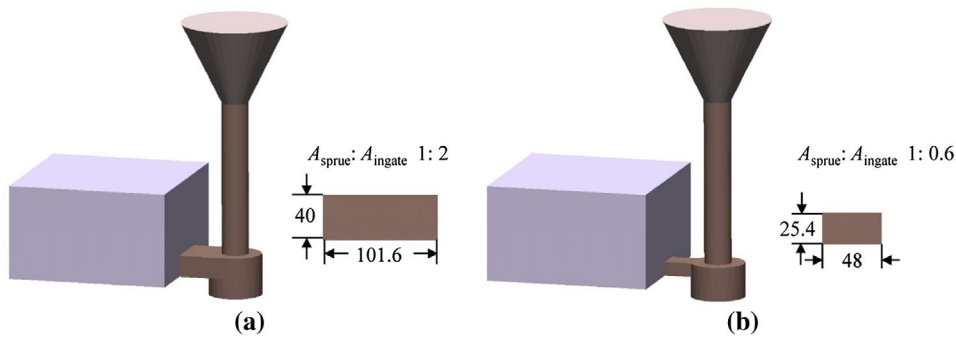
Ingate geometry for (a) the non-pressurised gating system and (b) the pressurised gating system. All dimensions in mm.
